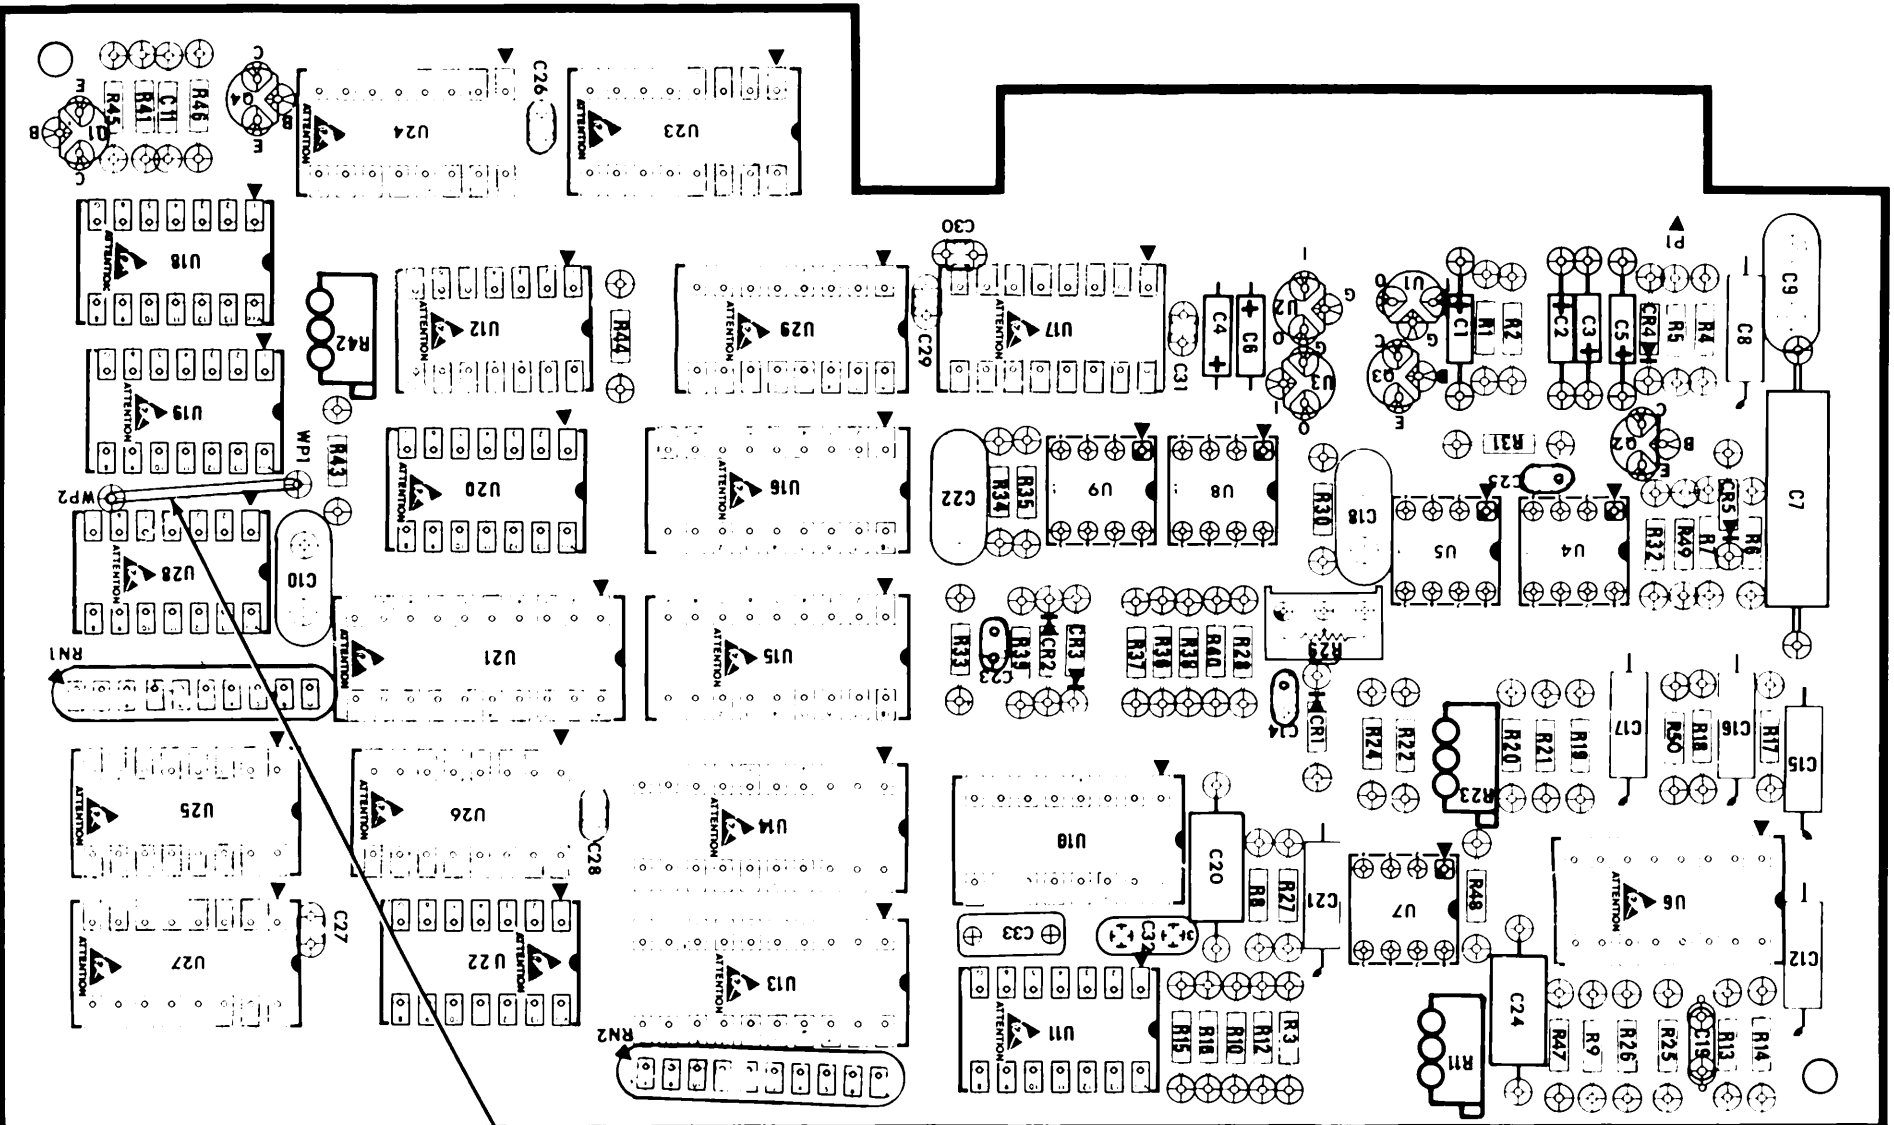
NO-FADE PCB ASSEMBLY
